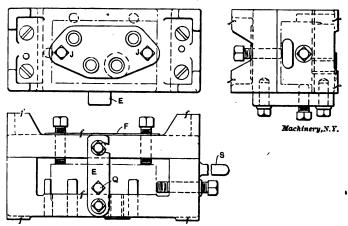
Jig Improved by adding Feet opposite Faces containing Drill Bushings
